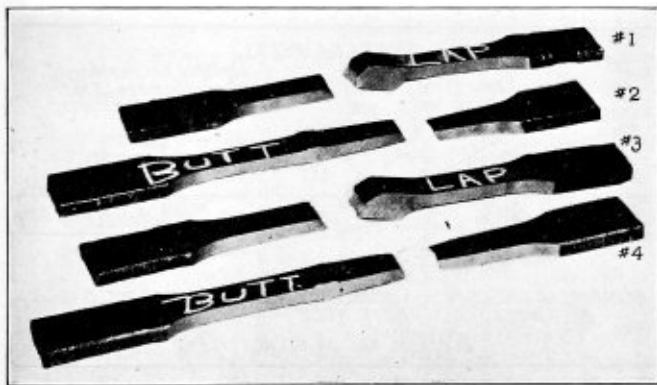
Lap and Butt Welded Specimens for Test
